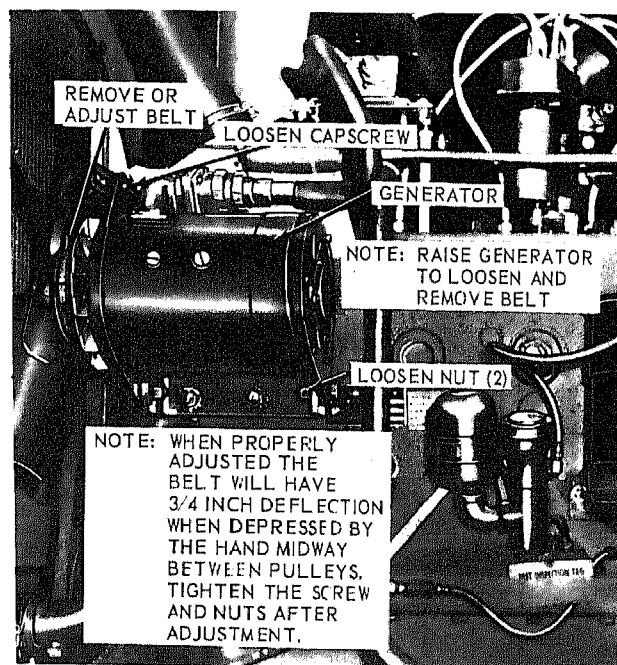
Crane engine generator belt, adjustment, removal and installation.
